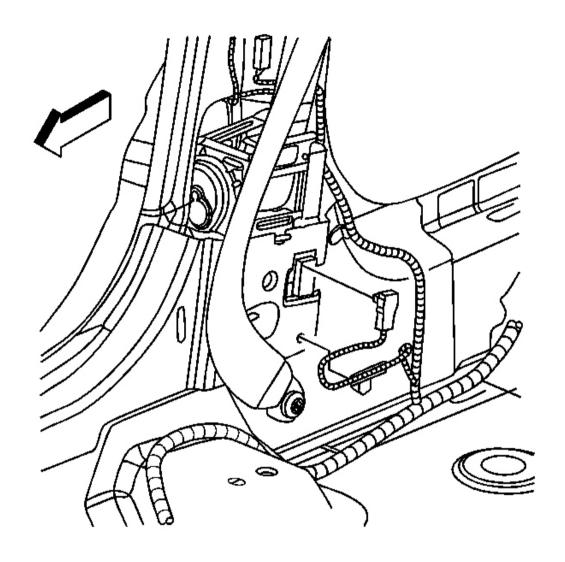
View Of Seat Belt Wiring Harness Routing Courtesy of GENERAL MOTORS CORP.
